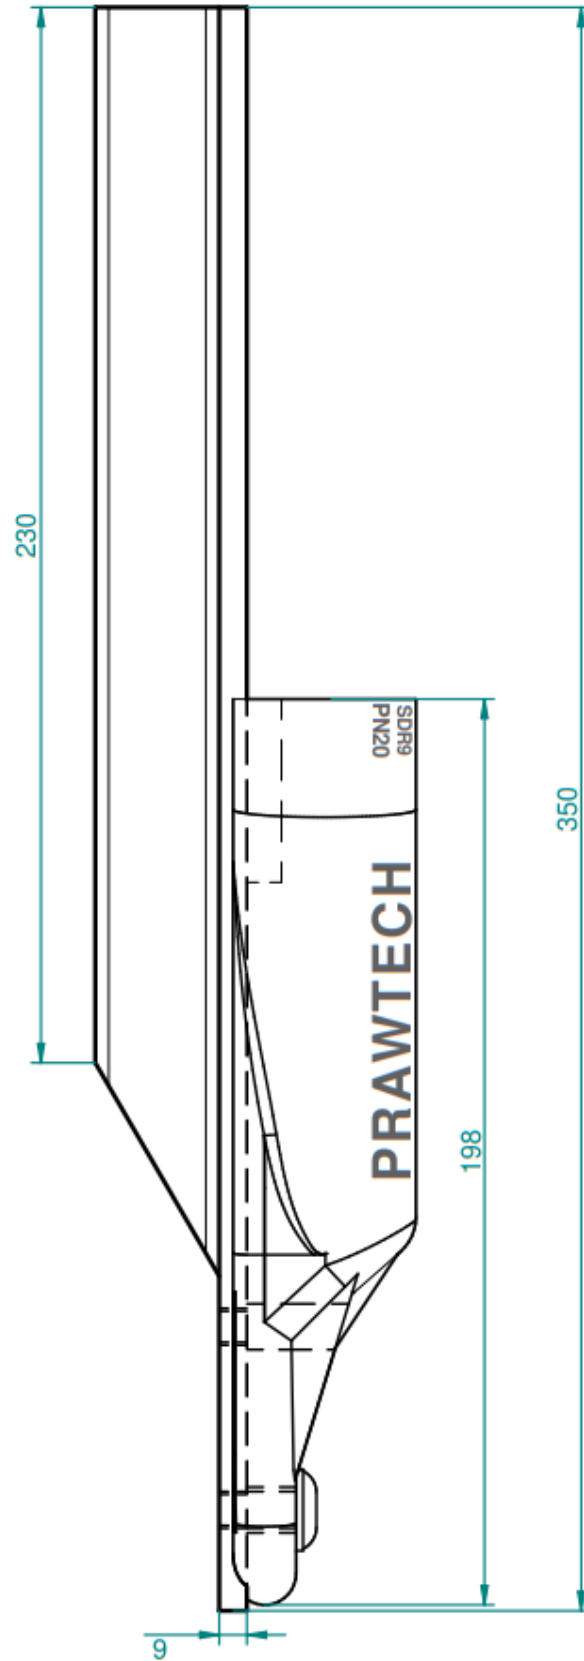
Side view of the FUTURA SLIM LAMELA 2 x 32 mm head with installed through pusher
